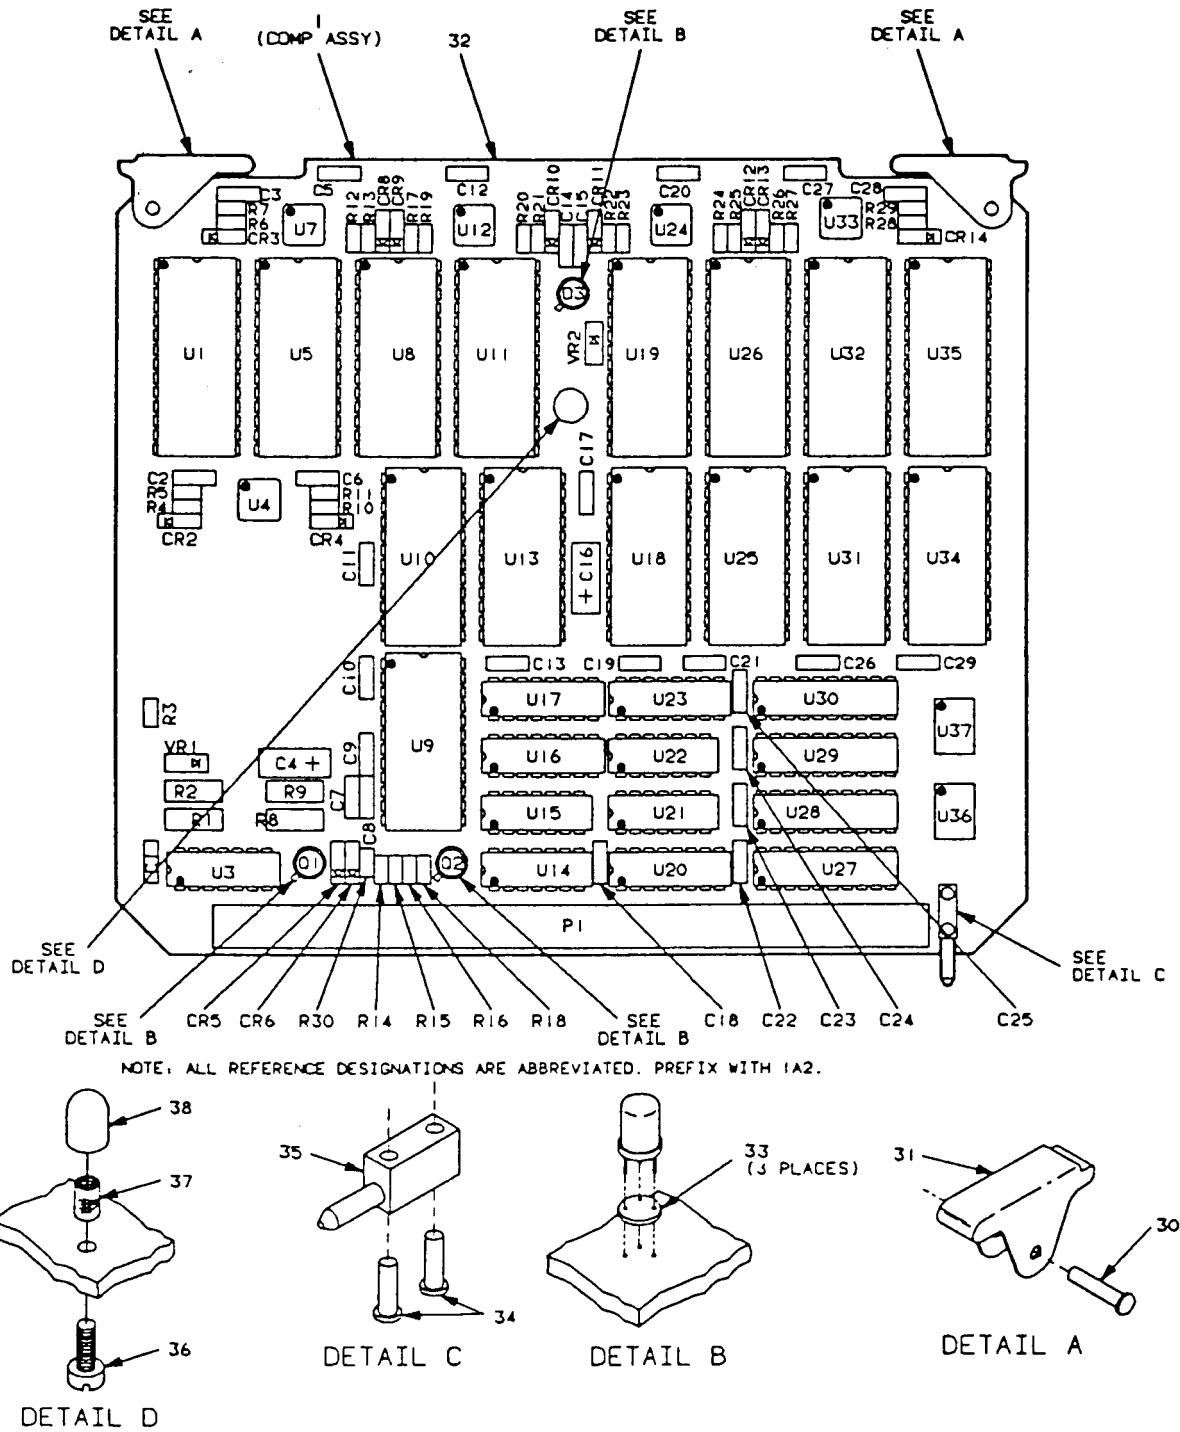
Circuit card assembly: memory (1A2) (9379230-5)
